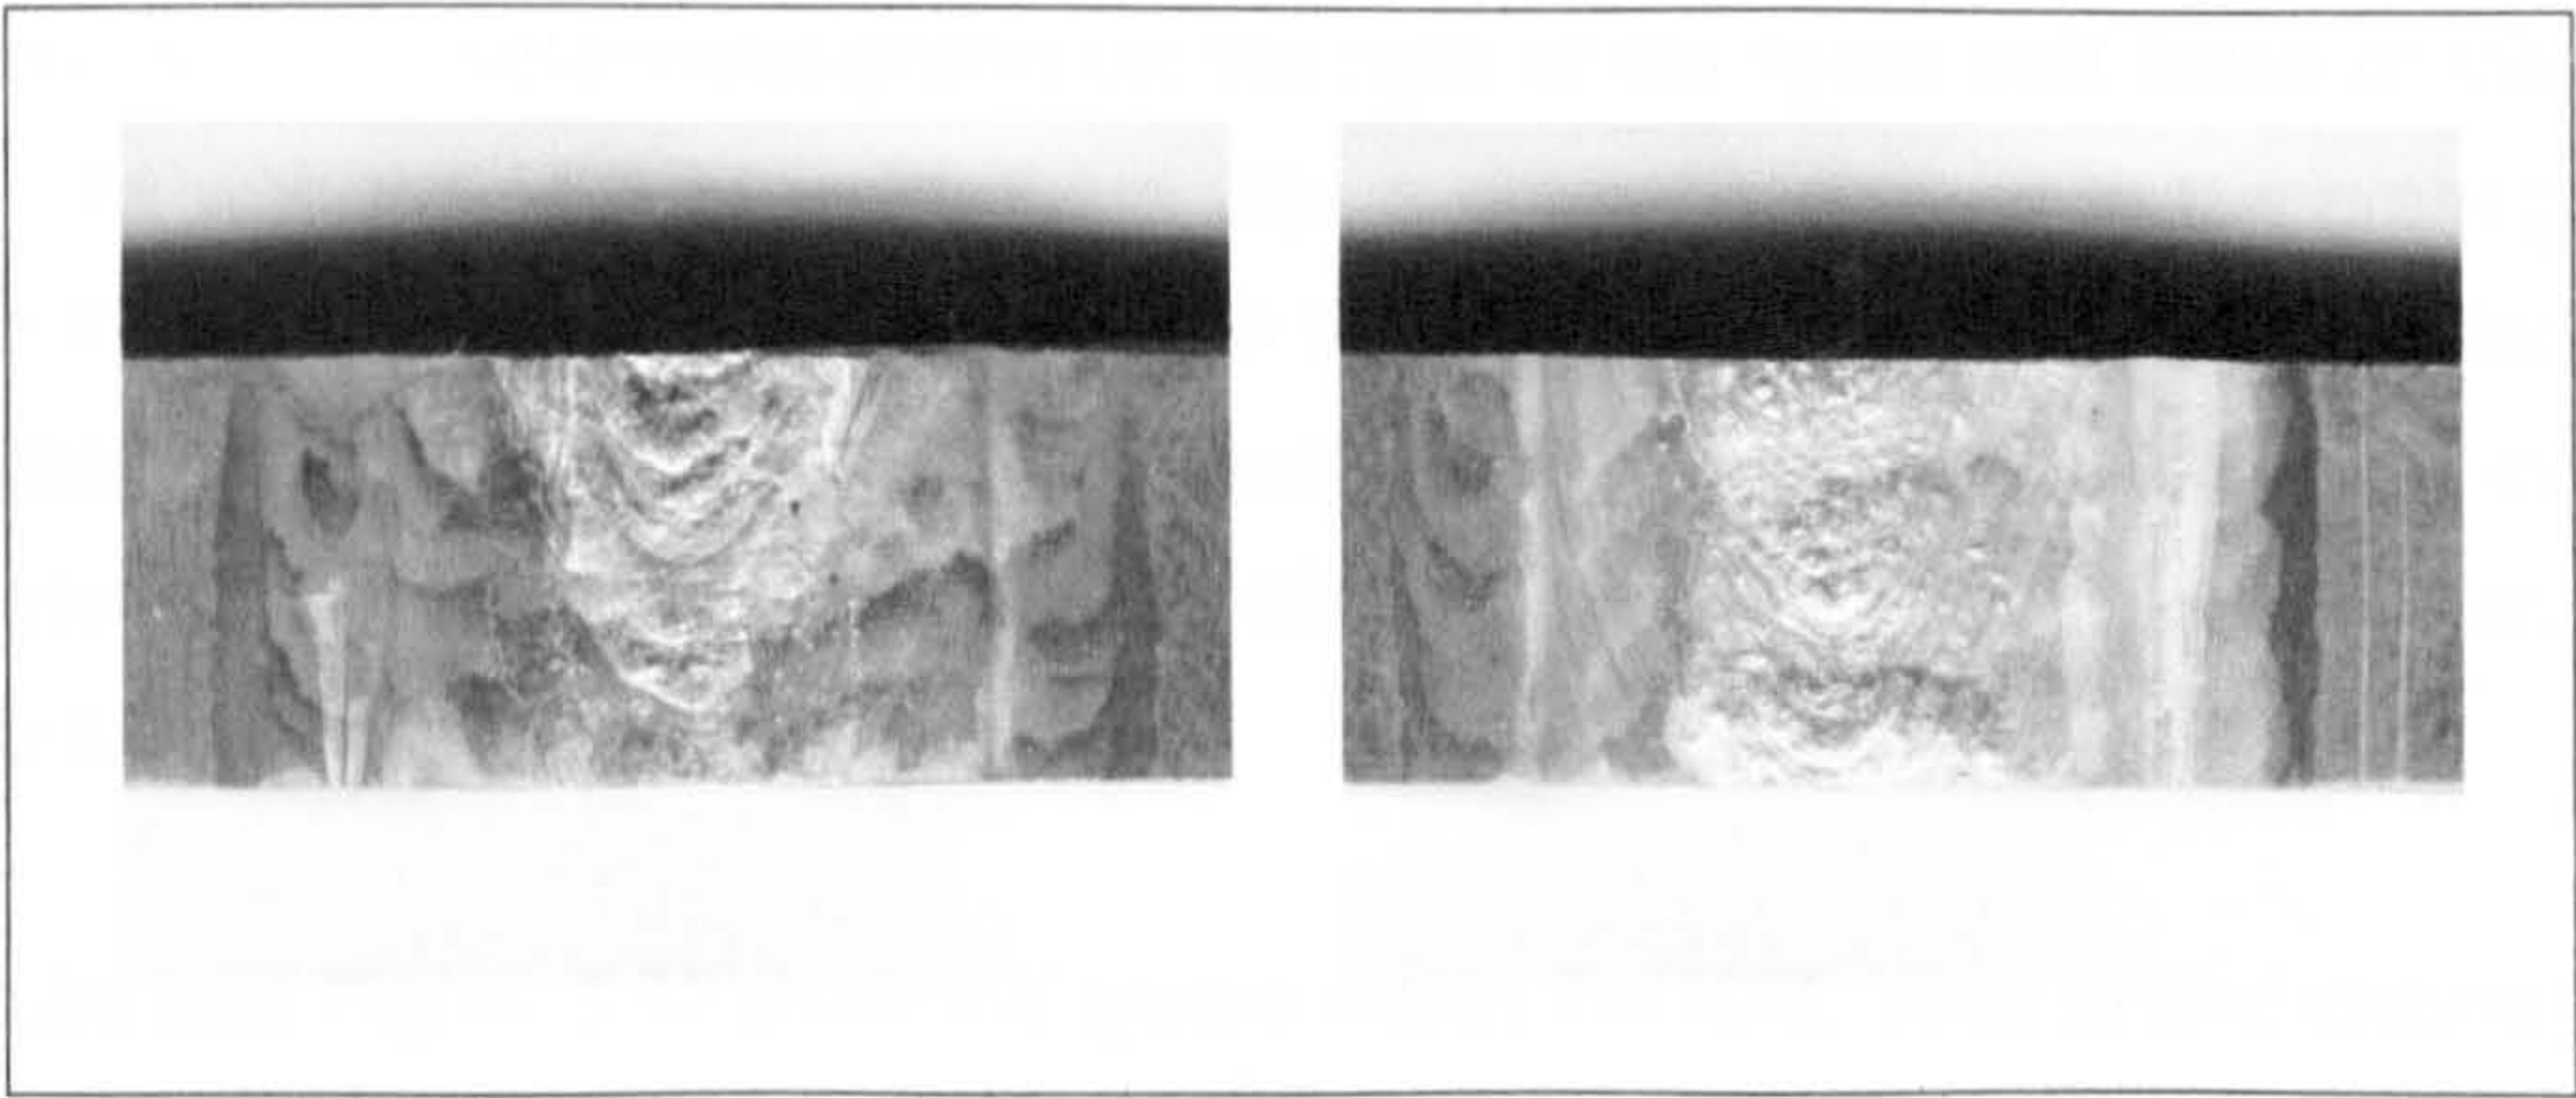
MIG HI weld bead, 1st run left, 2nd run right.
